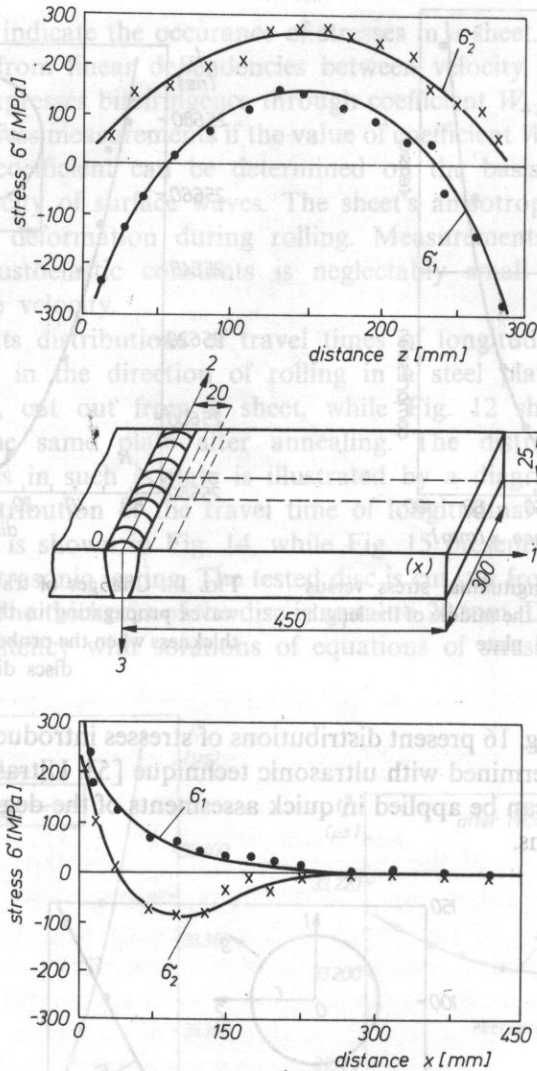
Changes of components perpendicular and parallel to the weld in terms of distance along the weld and perpendicular to the weld. Broken lines mark the path along which ultrasonic heads were shifted
